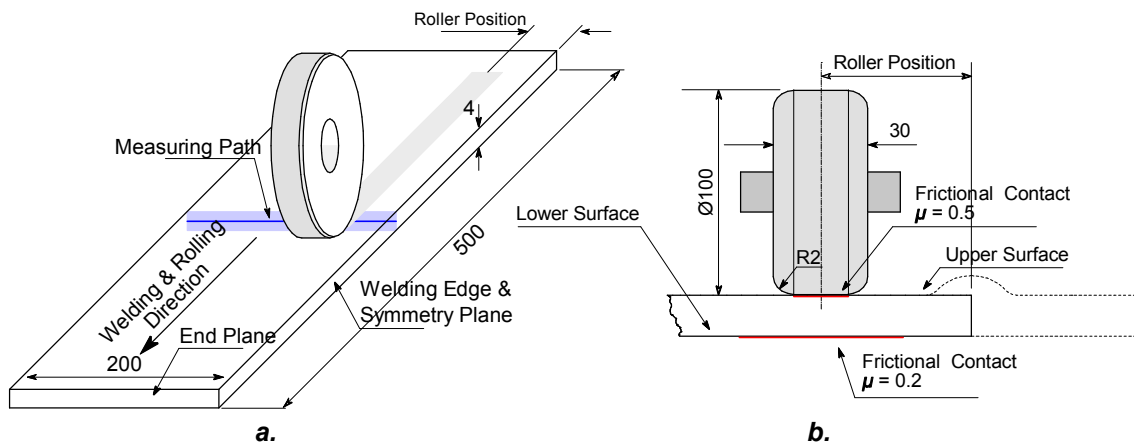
a.* Schematic representation of pre-weld rolling. *b.* Roller dimensions and position when rolling the upper surface (dimensions in millimetres).
